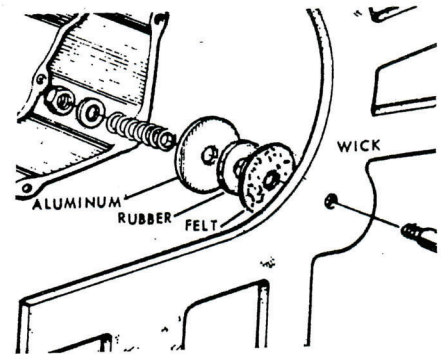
C—View showing proper assembly of wick, felt washer, rubber washer an aluminum washer on pickup stud.
